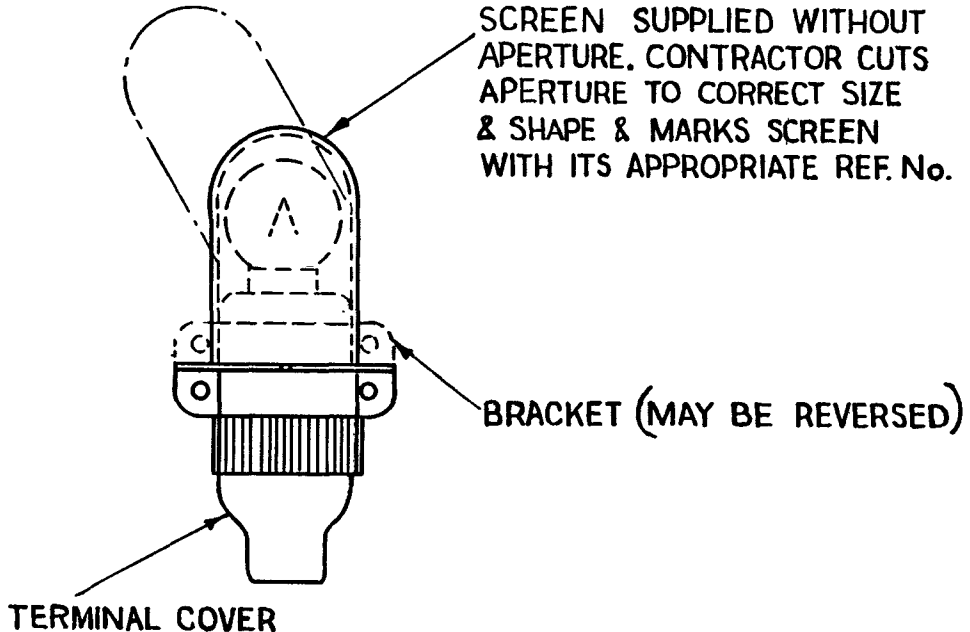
Sectional drawing of lamp, cockpit, floodlight, type C
